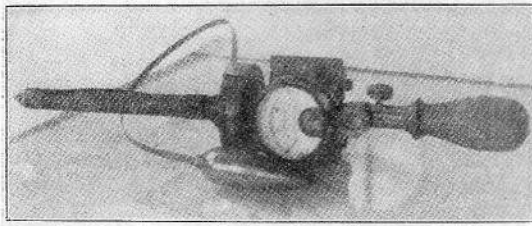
Sagging and Hogging Tests. Detail of Electric Gauge used in reading Drafts.
